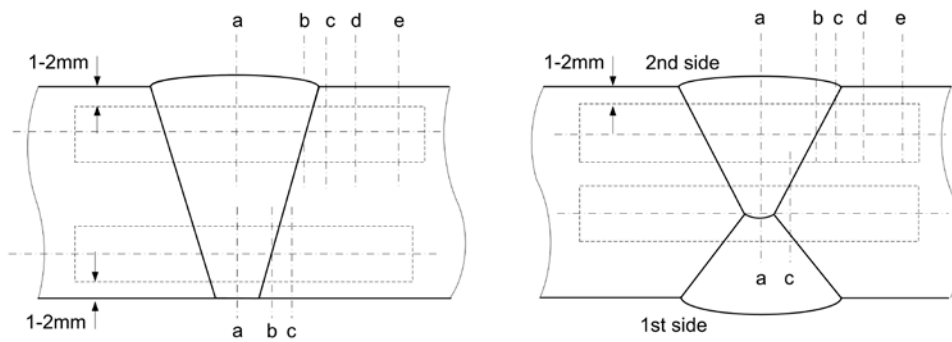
Location of Charpy V-notch for butt weld test assembly with heat input not exceeding 50 kJ/cm.
